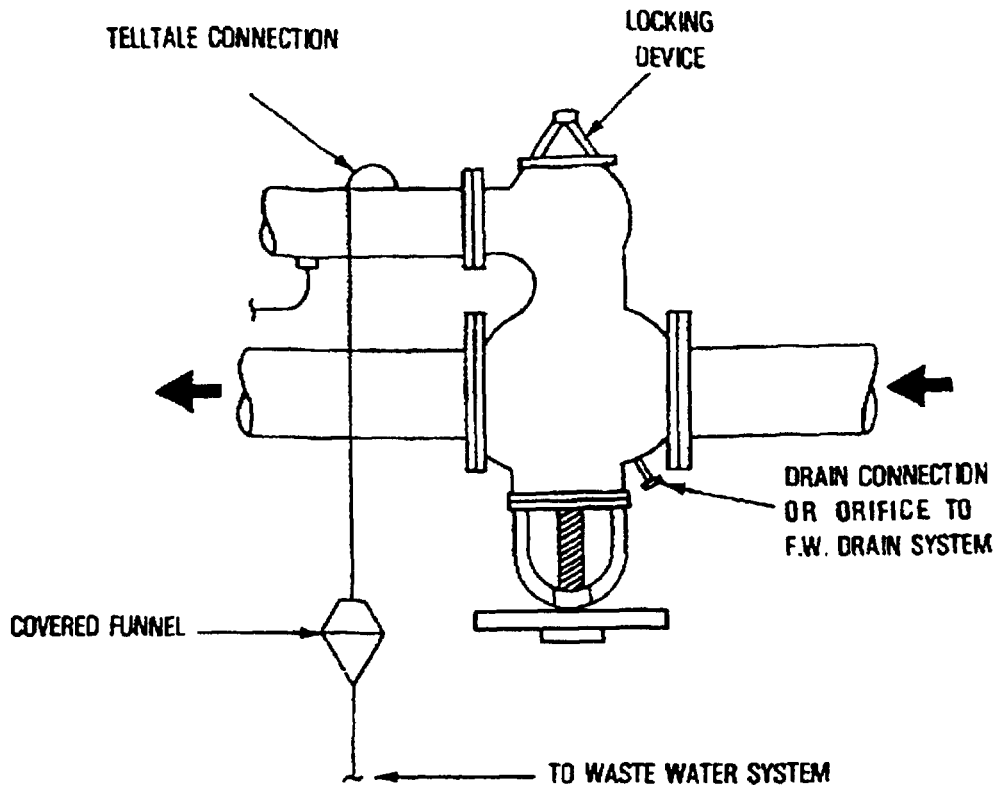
Combined Exhaust and Relief Valve Telltale and Drain Plug
